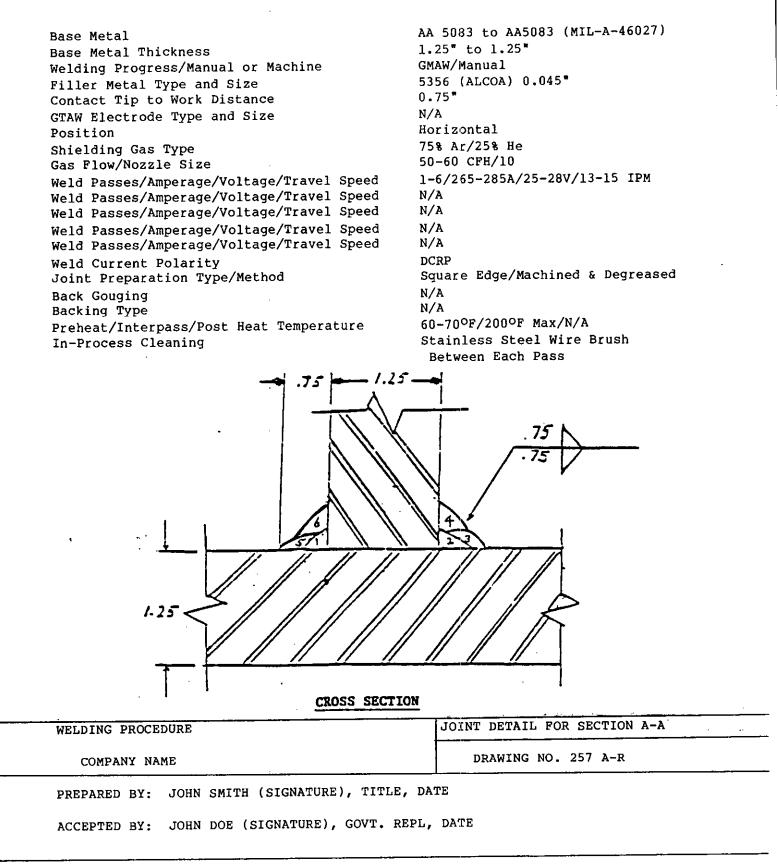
F FORMAT IV. Example of a sketch for a joint A-A in joint welding procedure.
